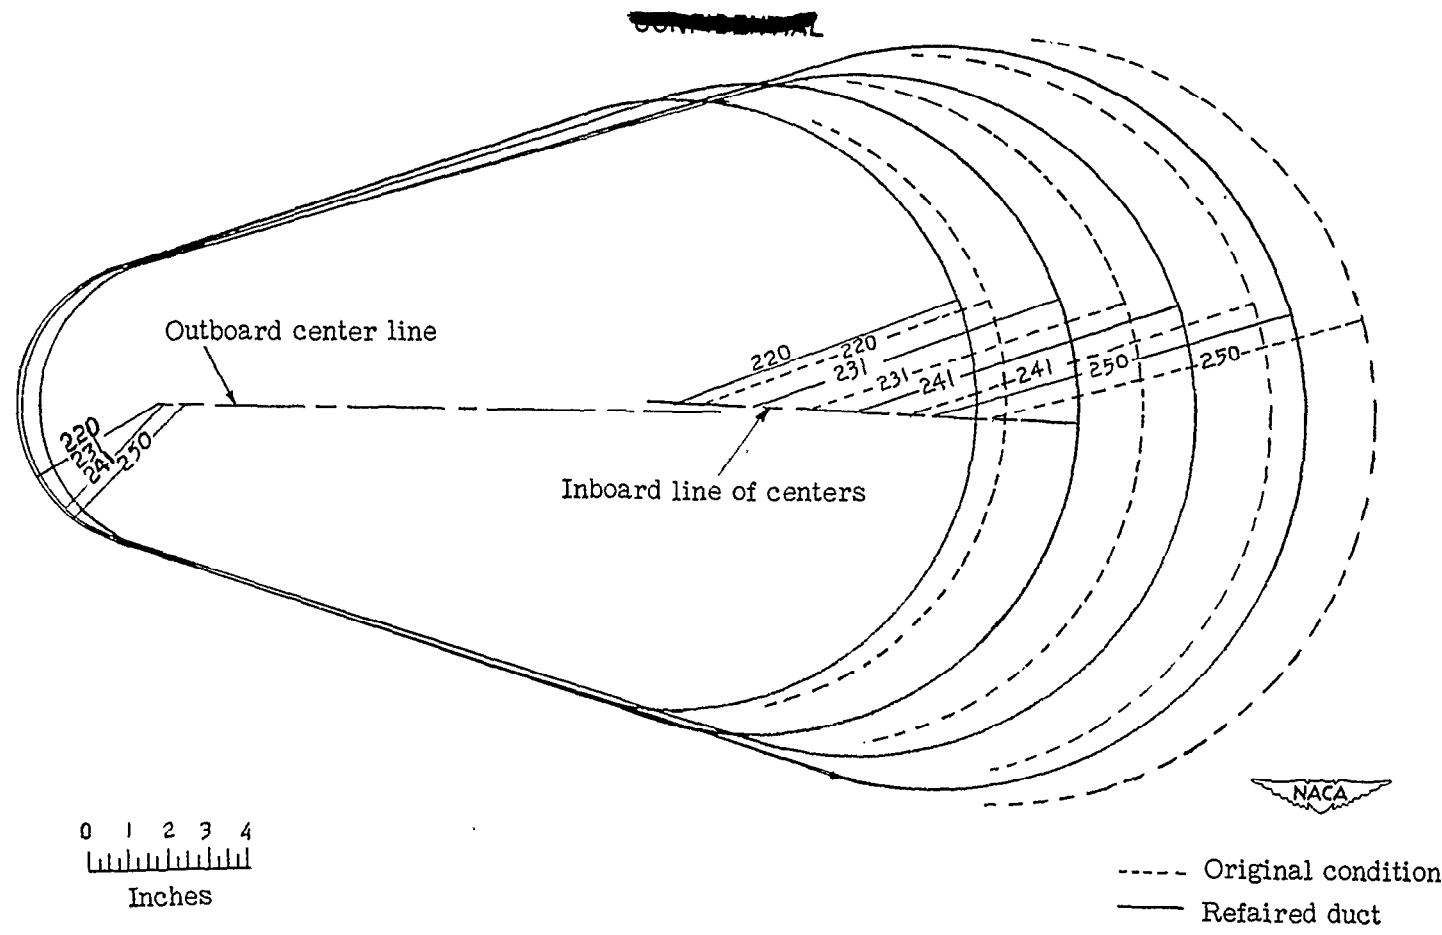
Section view of XF9F-2 engine-air inlet duct as refaired along inboard wall.
